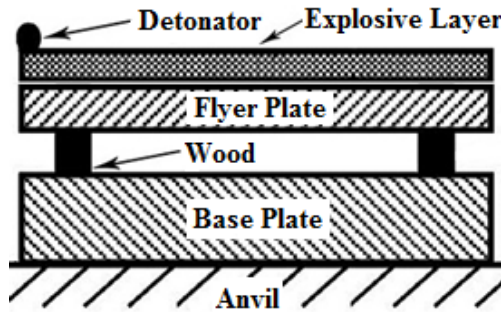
Schematic view of two-layer explosive welding.
